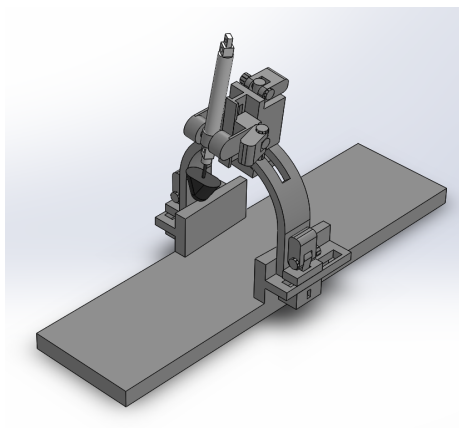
3D model of a mechanical tapping device assembly (Isometric view)
